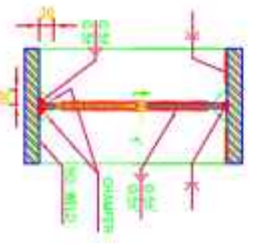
CRANE TERMINATION DETAIL GENERAL GUIDE
